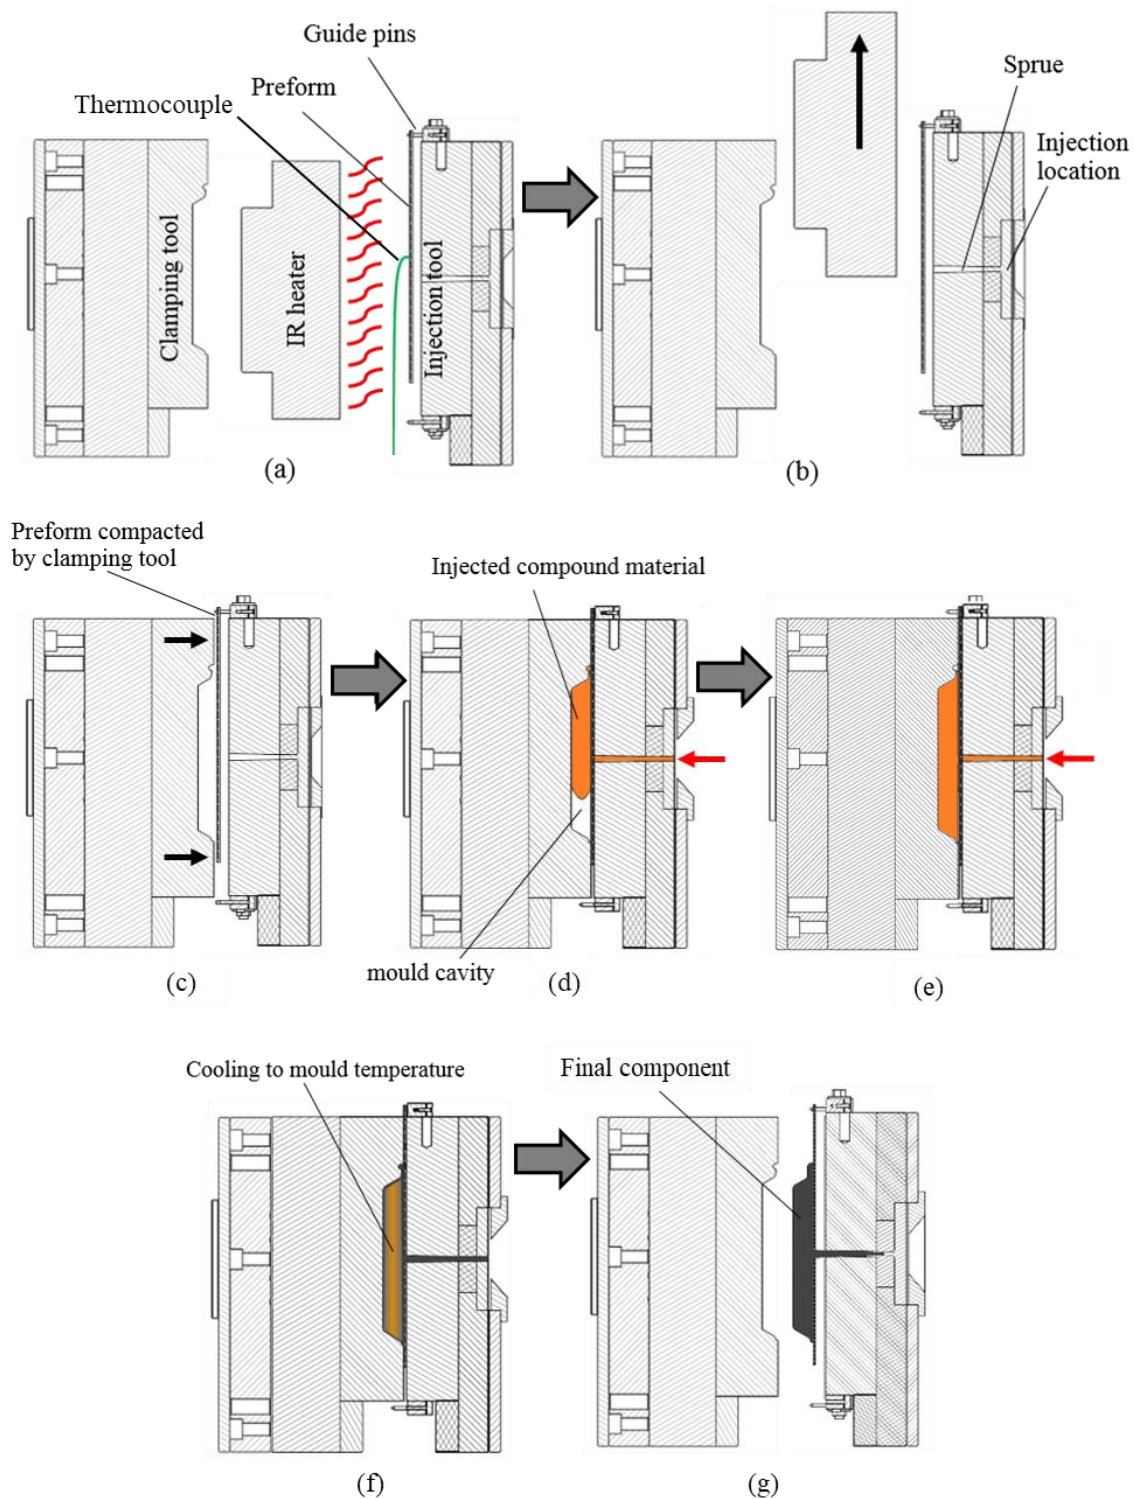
Section views of injection machine mould, showing (a) preheating, (b) transfer, (c) forming, (d) filling, (e) holding, (f) cooling and (g) demoulding stages.
